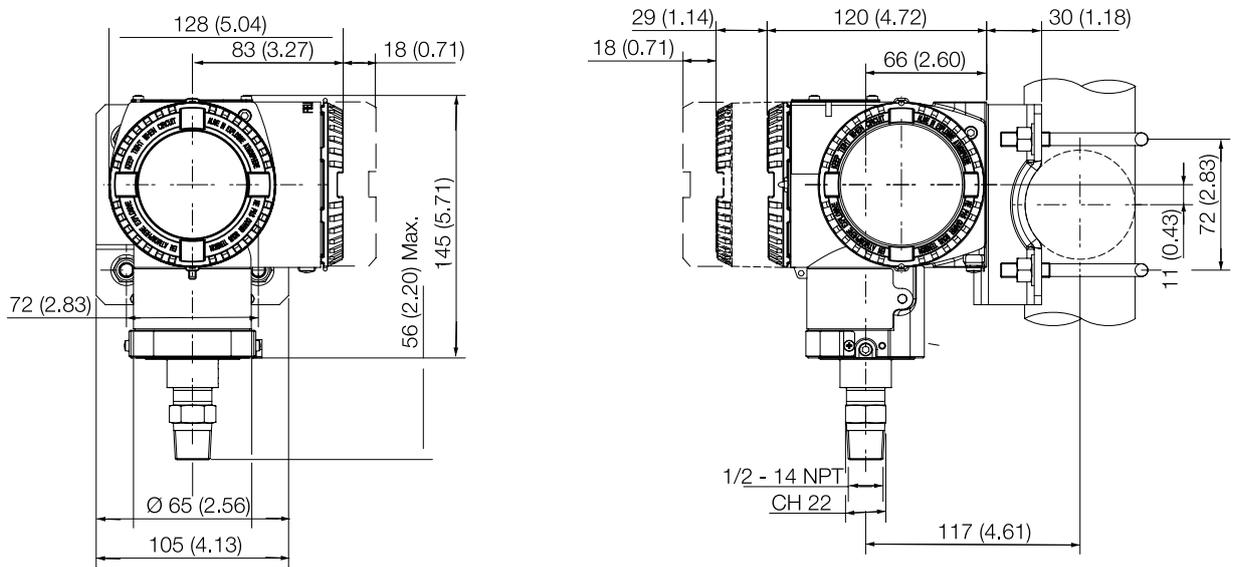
Dimensions - Barrel housing – 1/2 NPT female thread
